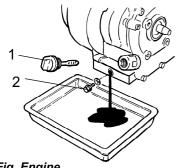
Oil dipstick/Filling 2. Drainage plug
